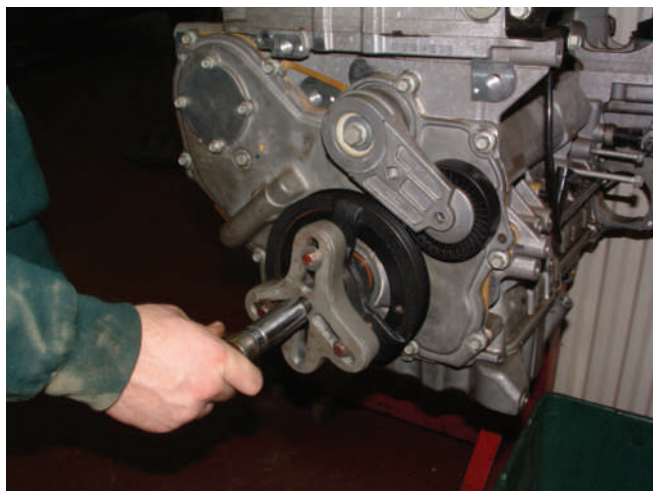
Using a puller to remove a crankshaft pulley.
